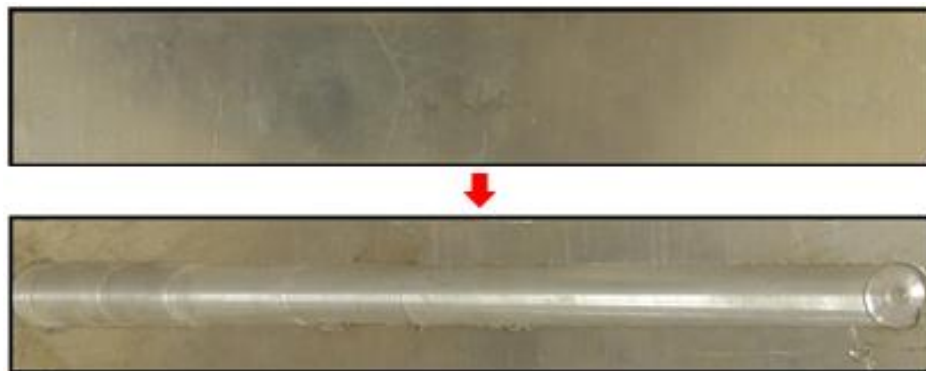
Weld joints and joint bottoms for welding parameters
